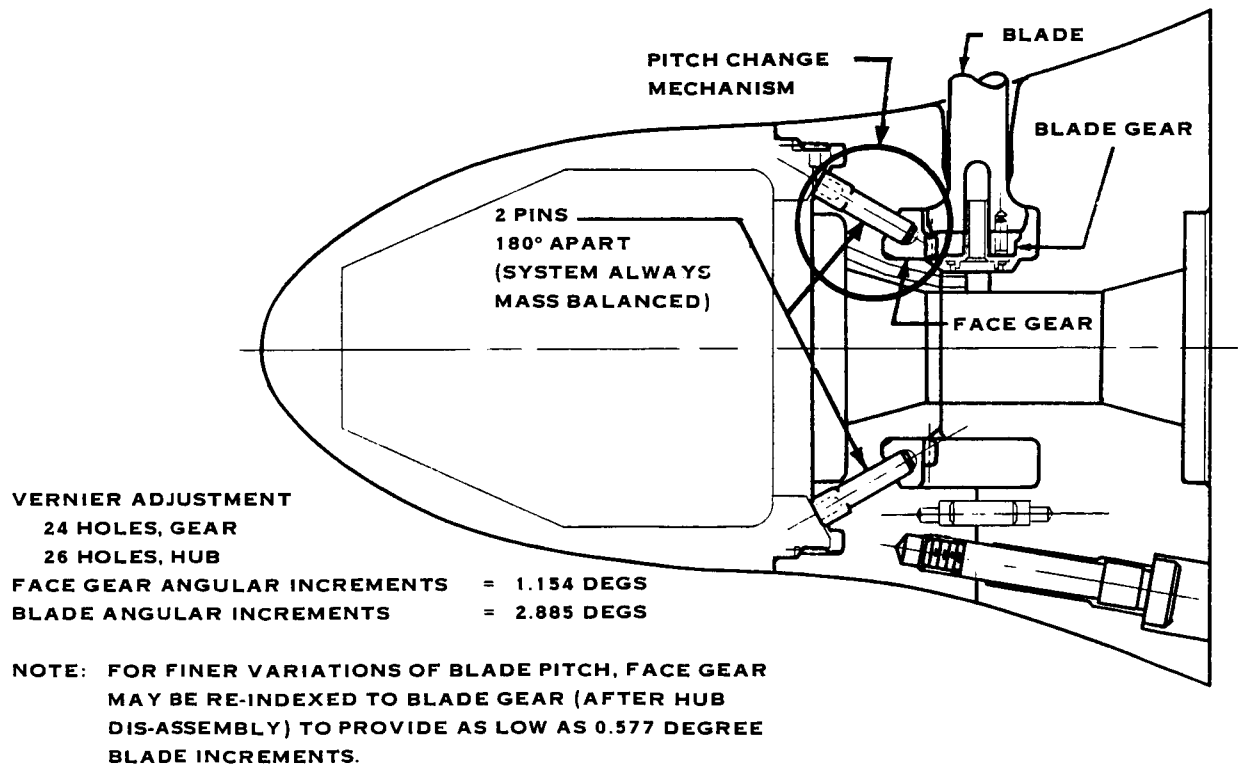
PITCH CHANGE DETAIL SKETCH
